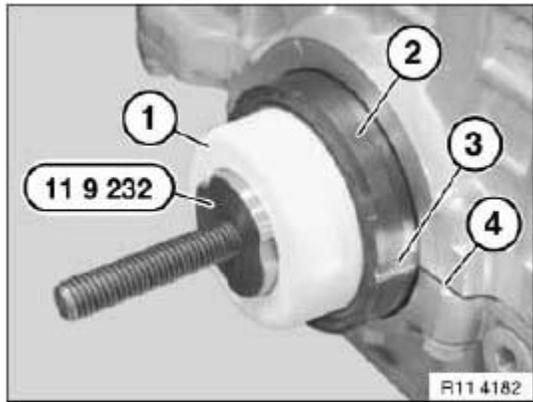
Pushing Support Sleeve With Radial Shaft Seal Onto Special Tool
